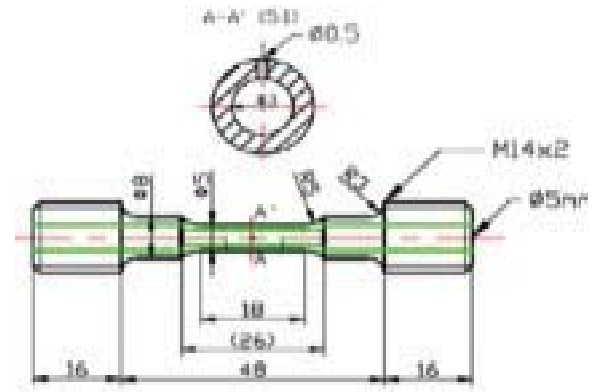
Geometry of specimen used (Dimensions are in mm)
